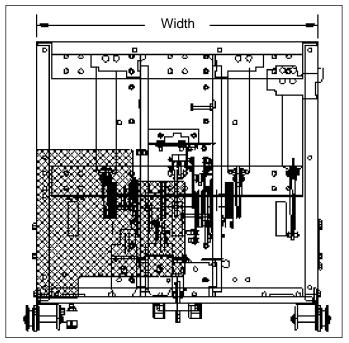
Typical Circuit Breaker Front View with CloSure[™] Tool Attached (approximate mechanism chassis width)
